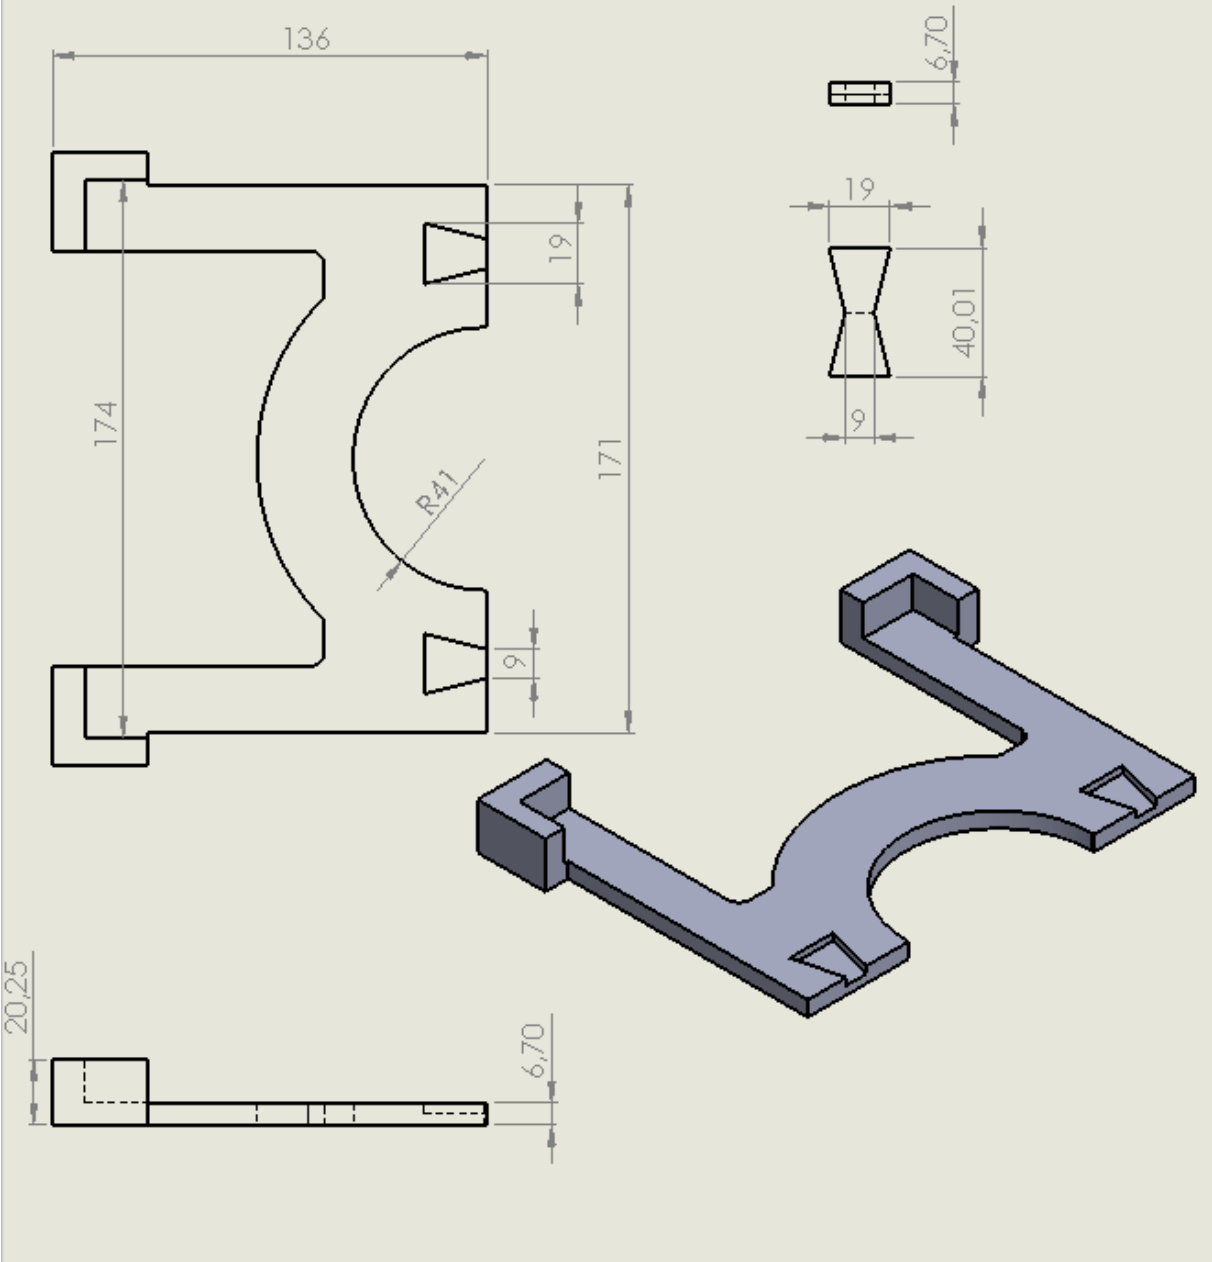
Drawing of the “Centring brackets for water bath” with dimensions.
